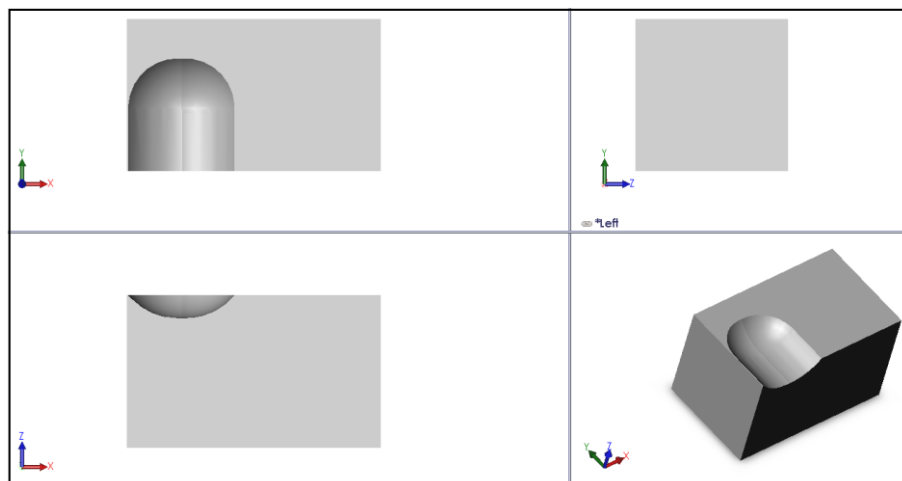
Output for tool path in Annexure 1 for ball end mill cutter.
